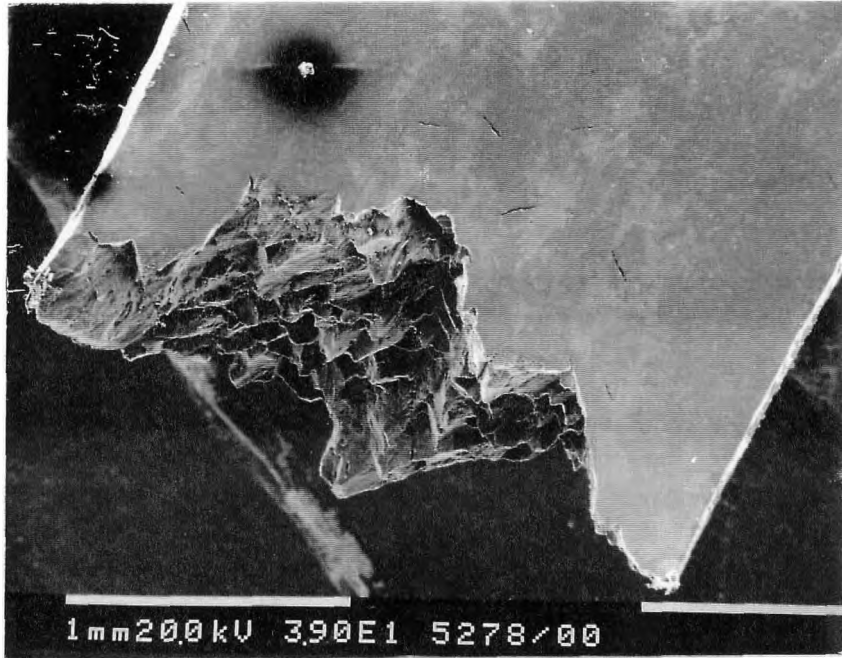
Fracture surface of the Al-Ni alloy Ohno cast at 524 mm/min.
